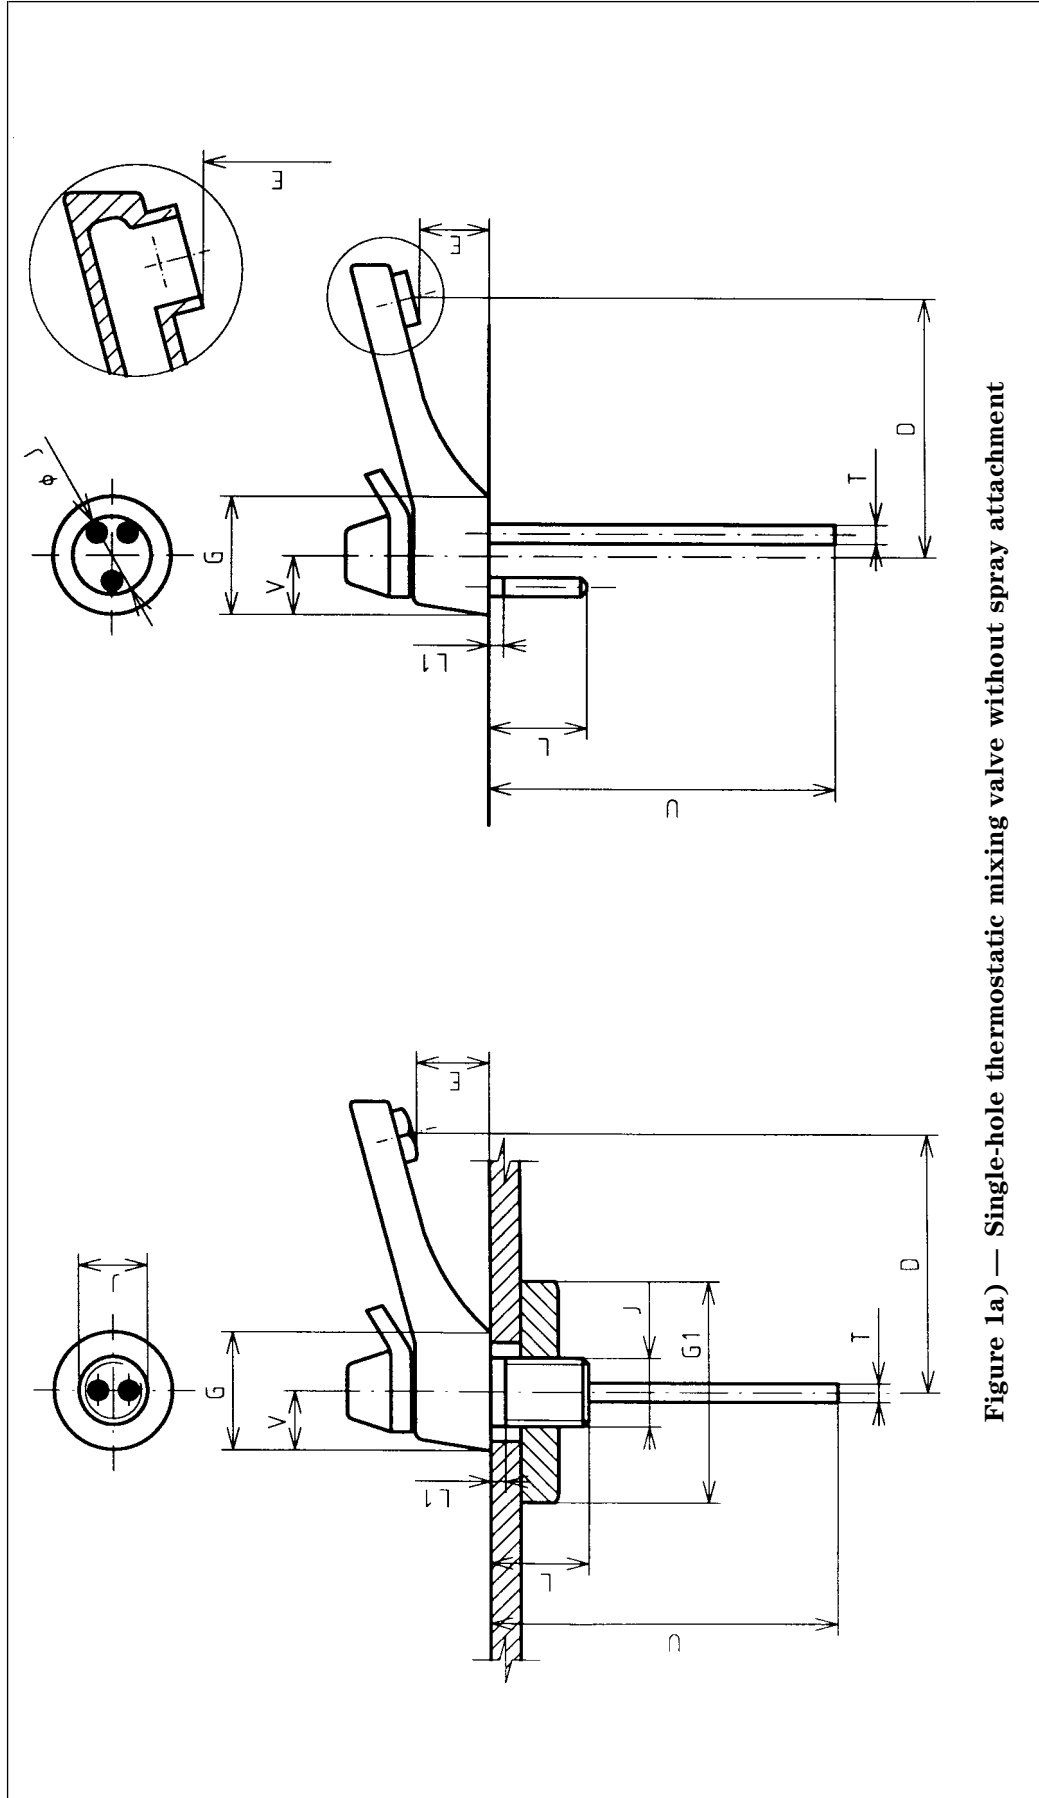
Single-hole thermostatic mixing valve without spray attachment
